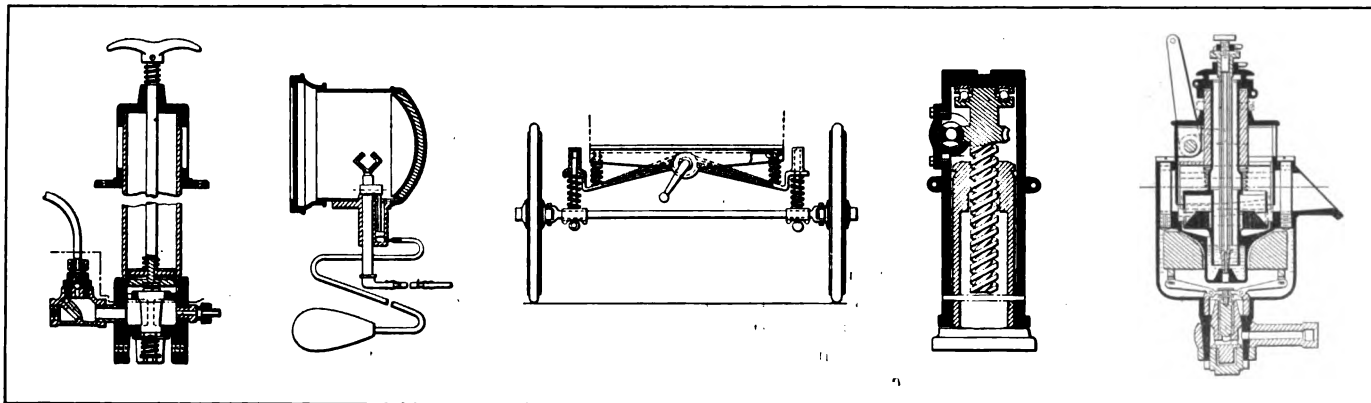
Halbleib starter. Fig. 2—Greenlaw dimming device Fig. 3—Dearing running gear. Fig. 4—Schatz jack. Fig. 5—Weiland carbureter
